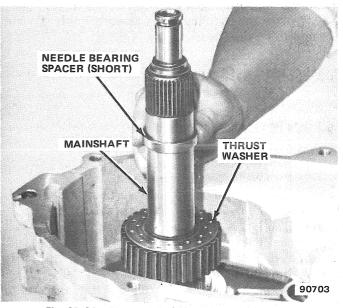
D-64. Mainshaft and Thrust Washer Installation
